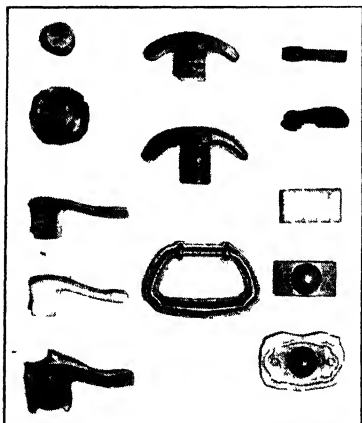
Press forgings produced from blanks sawed from extruded bars and, in two cases, preshaped cold.
